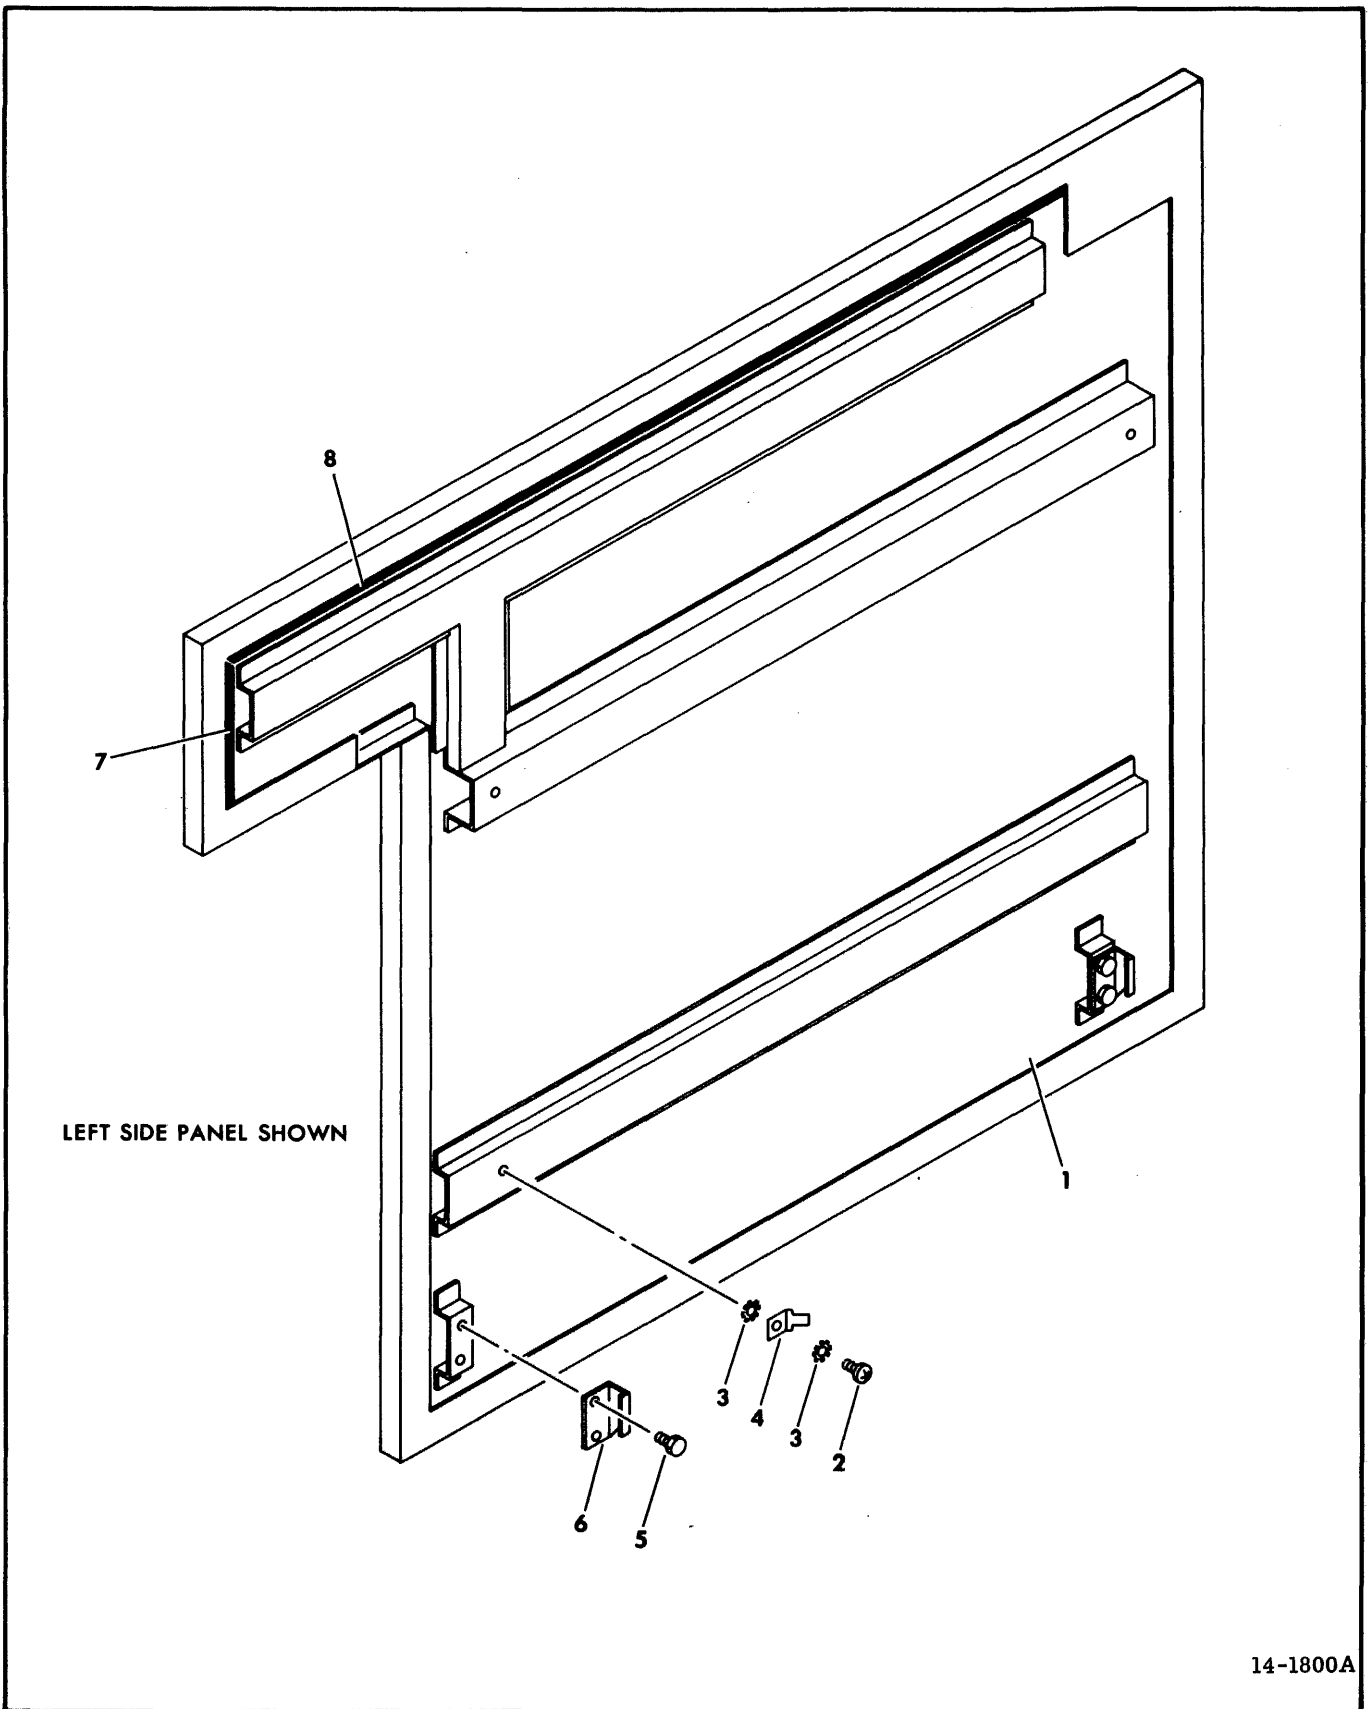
Rear Door Assembly - Acoustic Cabinet
